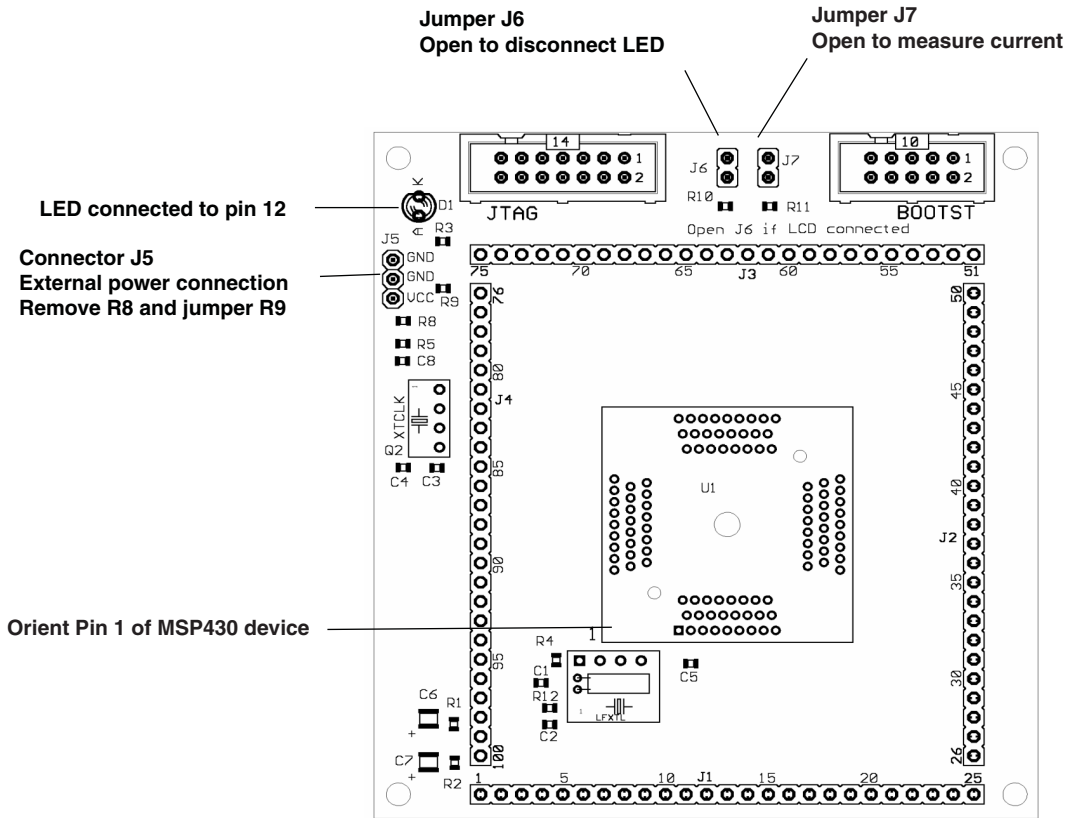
MSP-TS430PZ100 Target Socket Module, PCB
